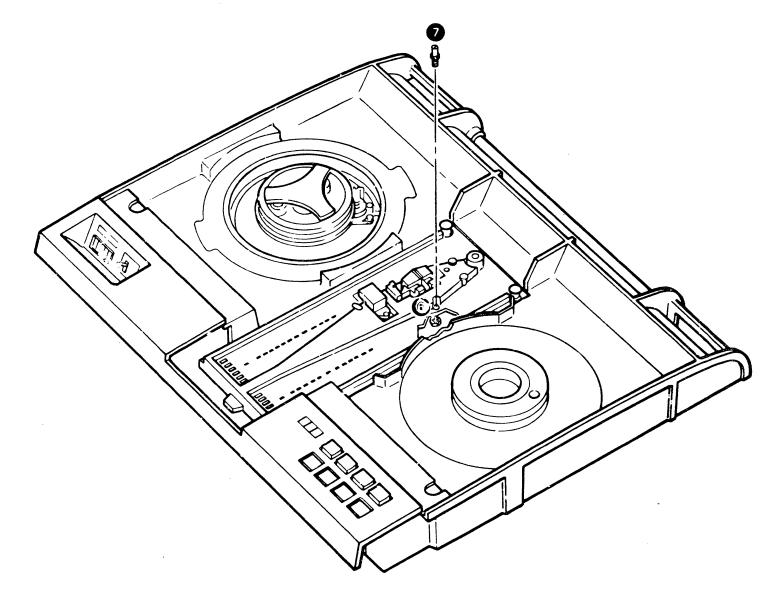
Vacuum-Up-Switch Assembly (Part 2517780) Removal and Replacement
